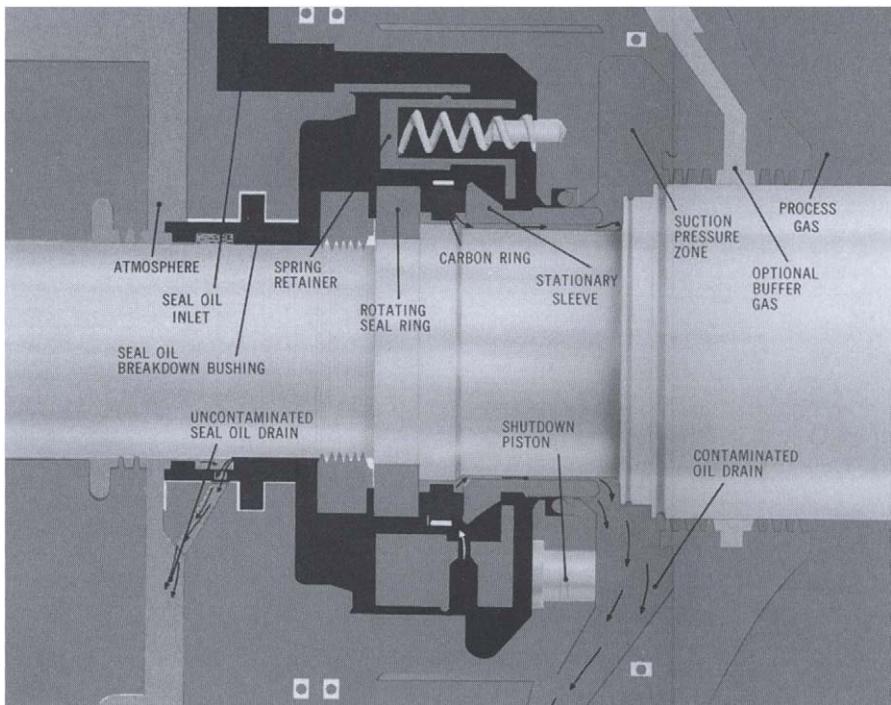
Compressor contact seal (Courtesy of Elliott Co.)
